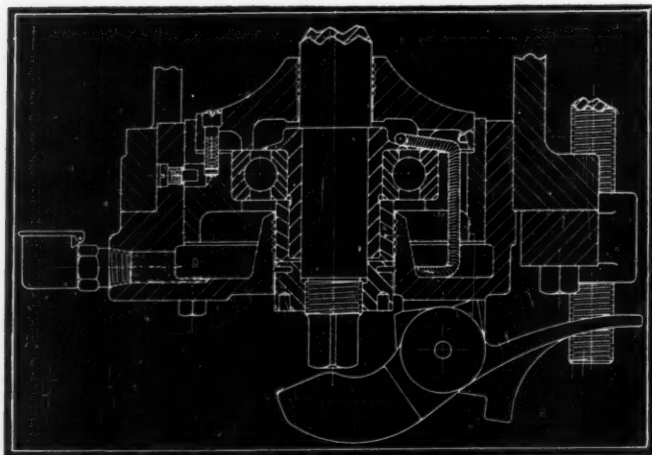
Ball bearing housing with wick feed and ample reservoirs for oil
